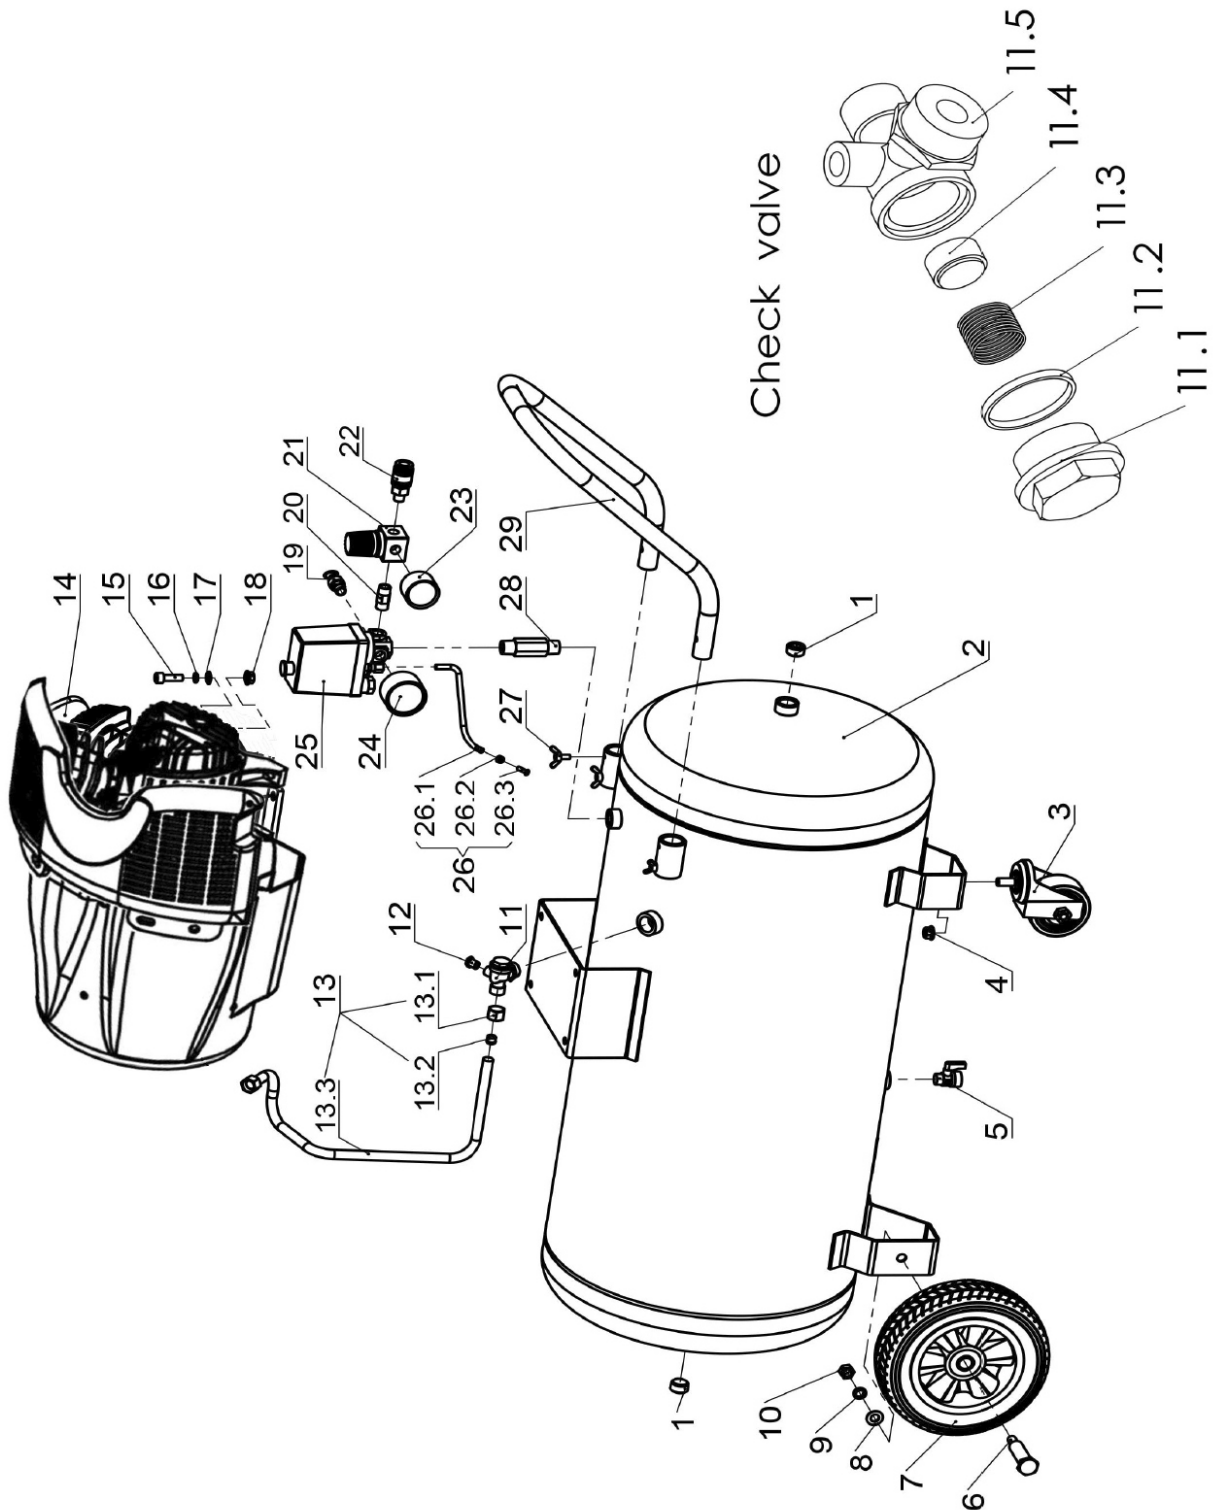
Spare parts drawing 1: MOBILBOY 421/100 AC
